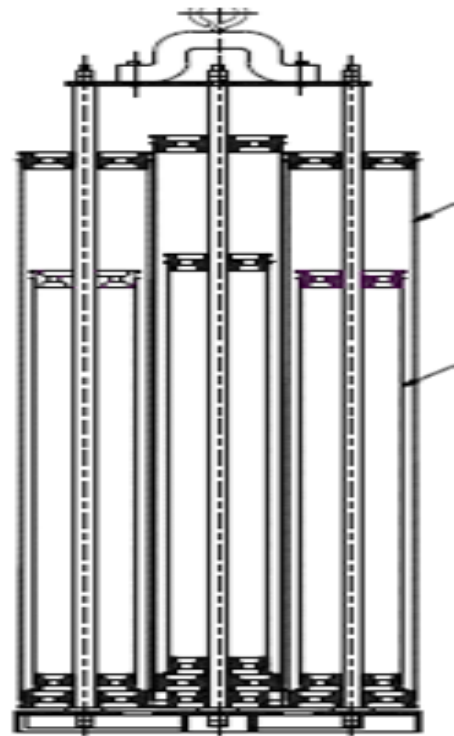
Annealing fixture for accommodating regular dia preform tubes inside the higher dia tubes
